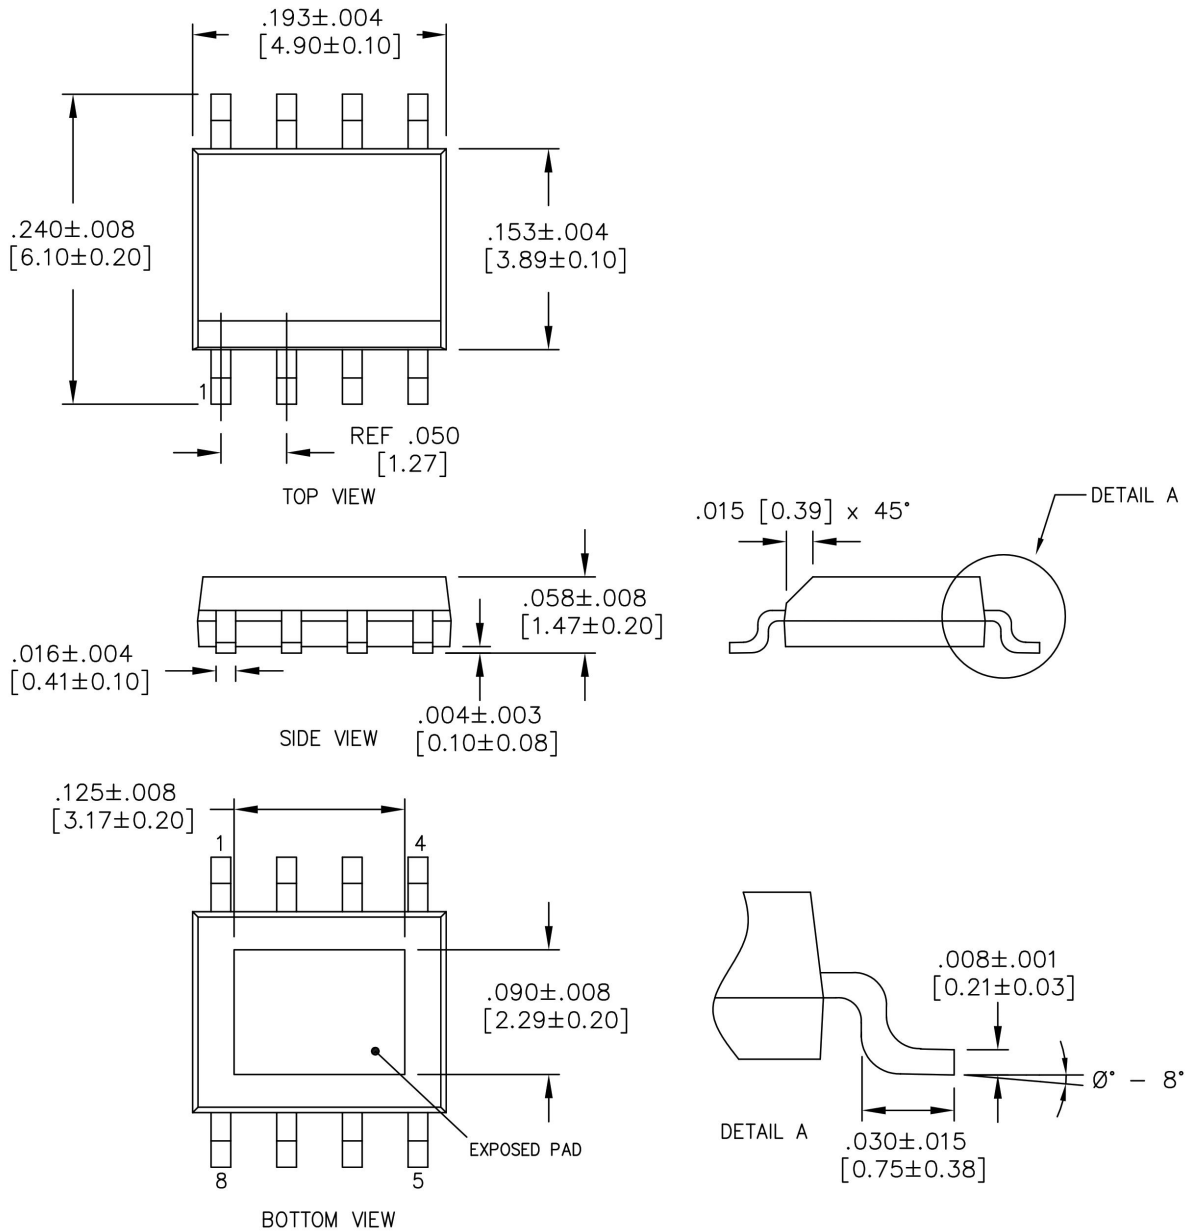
SOIC-8NE Plastic Package Dimensions (all dimensions in inches [millimeters])
